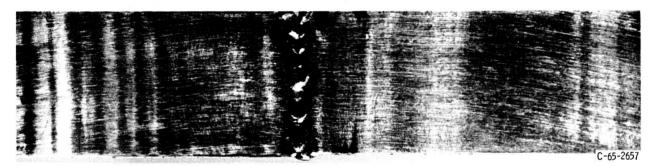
Longitudinal section through joint gas tungsten-arc brazed with tungsten - 25-percent osmium illustrating braze metal cracking transverse to joint. Specimen 304.
